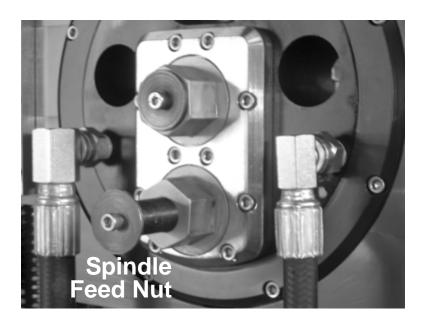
Turn the spindle feed nut counter-clockwise to feed the blade into the pipe.
